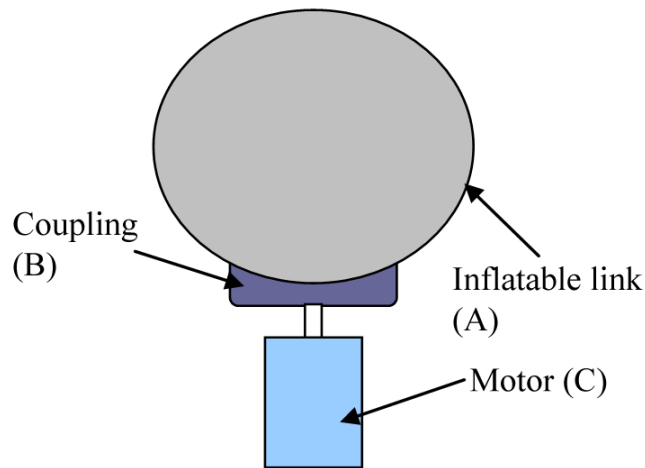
Schematic showing the components of the system, looking into the cross section of the link. The coupler is bonded to the link using polymer adhesives and thermal welding.
